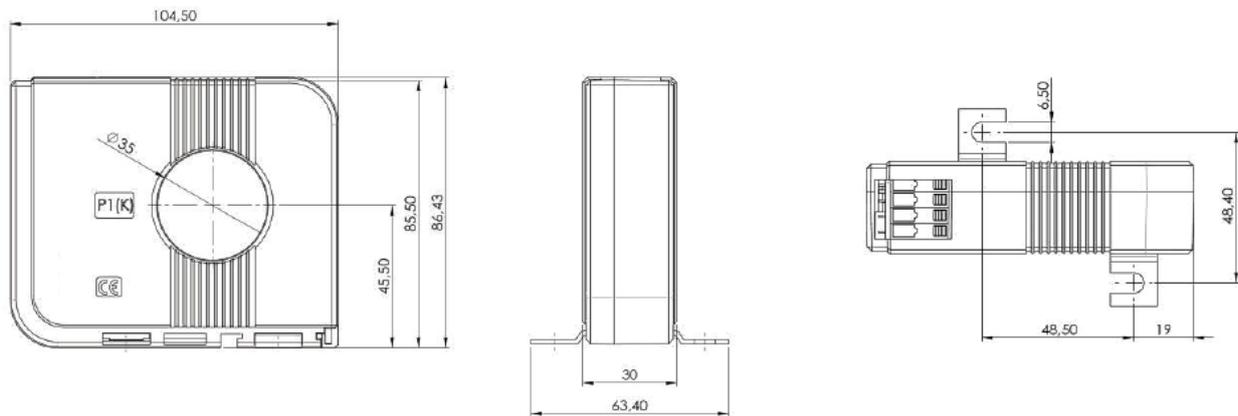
SCT4216-0025 dimensions, all dimensions in mm
